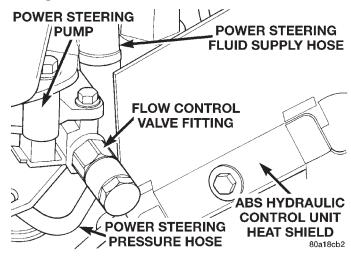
Power Steering Pressure Hose Attachment To Pump With Variable-Assist Steering
